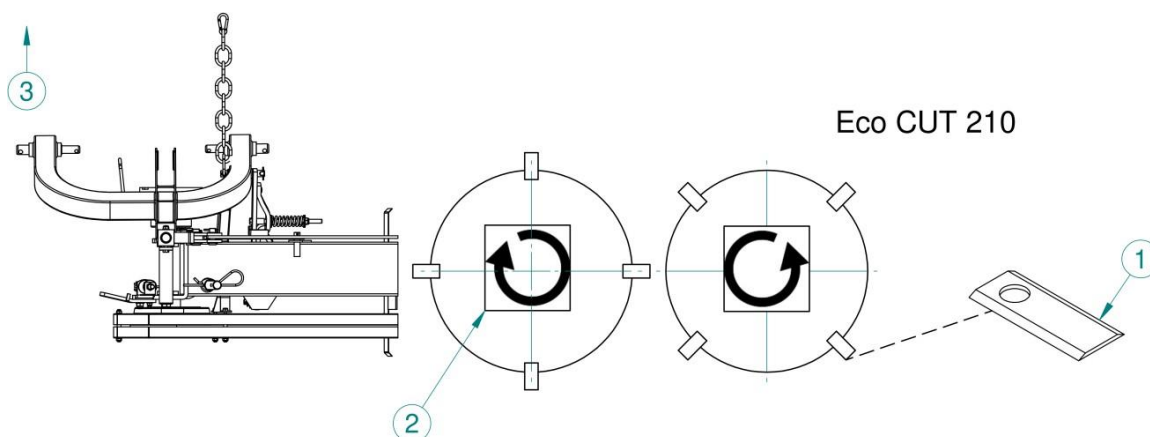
Diagram of the proper mounting of holders and blades on the working discs: 1) Cutting blade, 2) Direction of cutting discs rotation, 3) Direction of mowing
